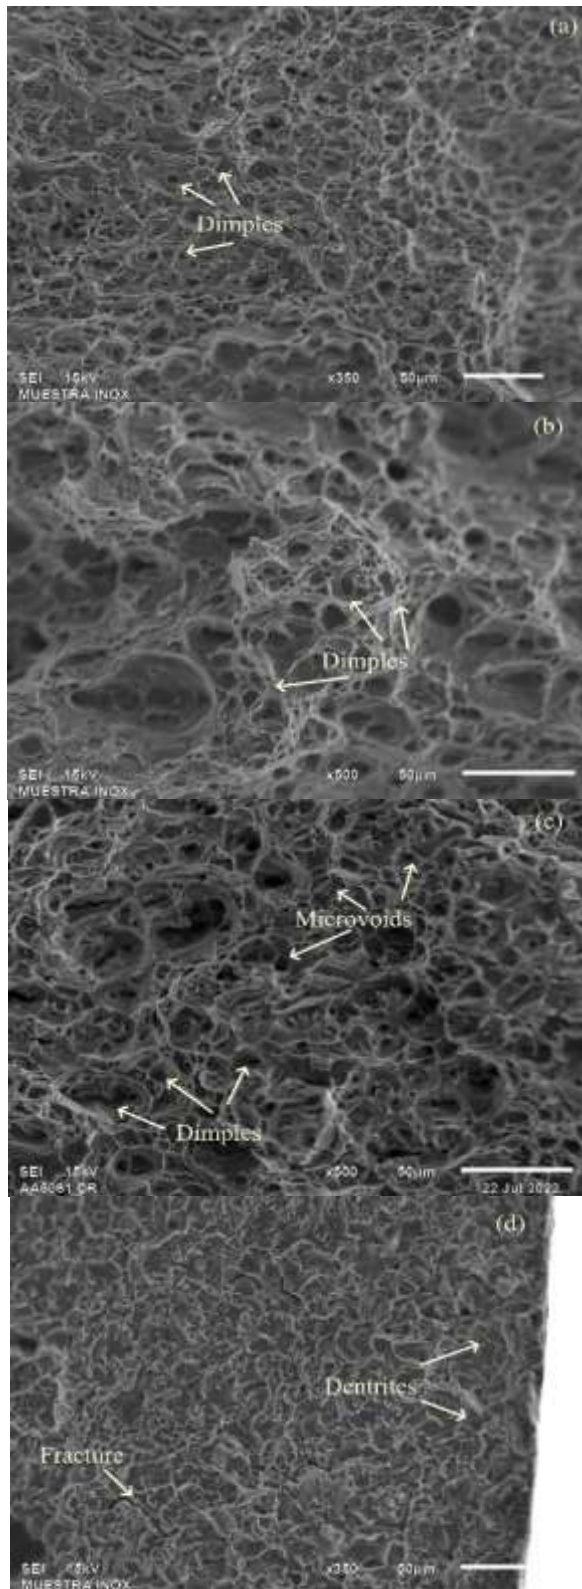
Examples of the fracture patterns of the room temperature tensile tested samples: (a) base metal, (b) “As welded” sample, (c) CT sample, and (d) HT sample.
